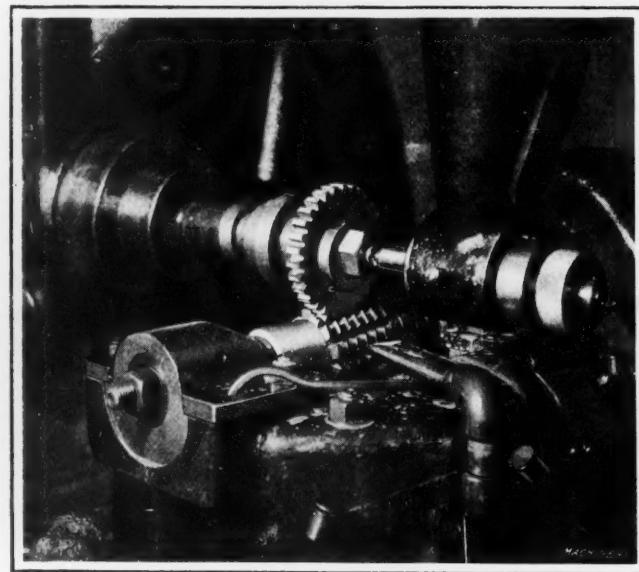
Roughing Operation on a Spur Gear, performed by the Hobbing Process
